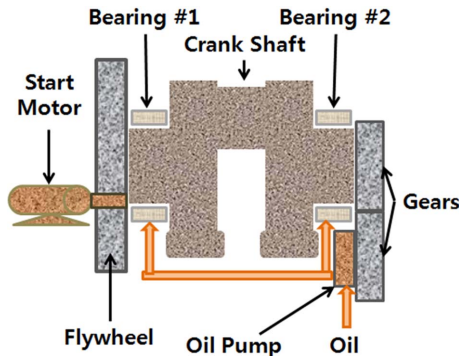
The schematic drawing of the journal bearing system of a stripped down single cylinder engine.
